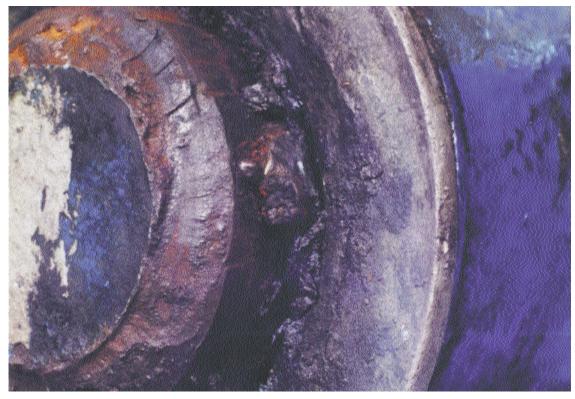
Seaward right stub axle - fracture surface - seized in support foot
